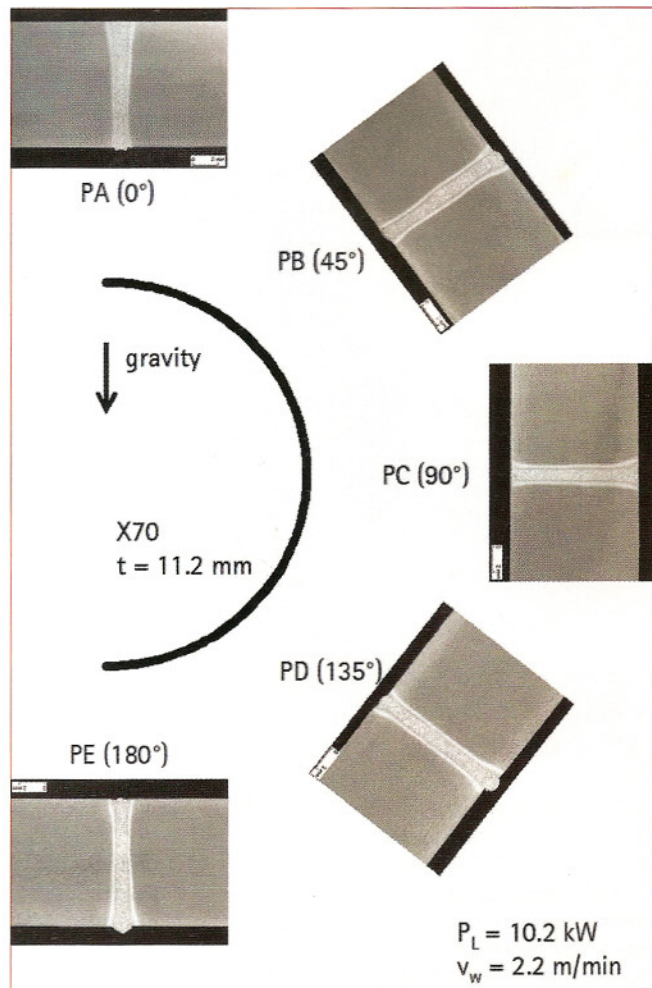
Pipeline steel X70, sheet thickness 11.2 mm, welding positions PA to PE, beam power 10.2 kW, welding speed 2.2 m/min. (Photo courtesy of BIAS GmbH.)
